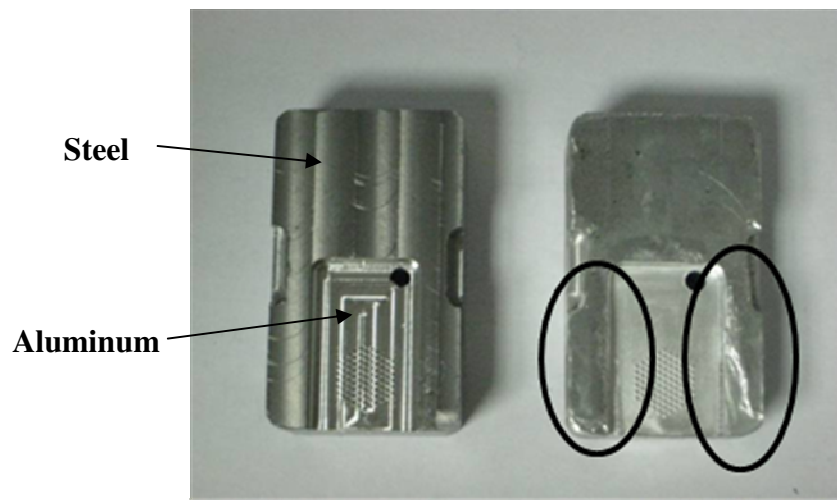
On the left is a redesigned mold made of steel with aluminum insert, on the right is a mold made from AL1000 which easily deforms. Deformed areas are shown in ellipses.
